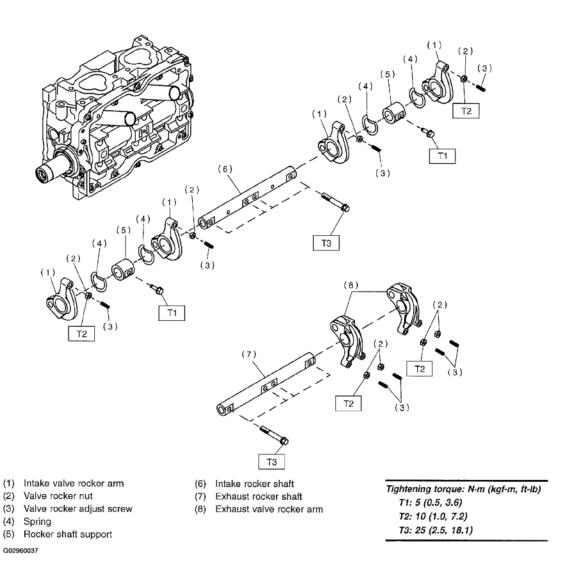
Identifying Valve Rocker Assembly Components Courtesy of SUBARU OF AMERICA, INC.
